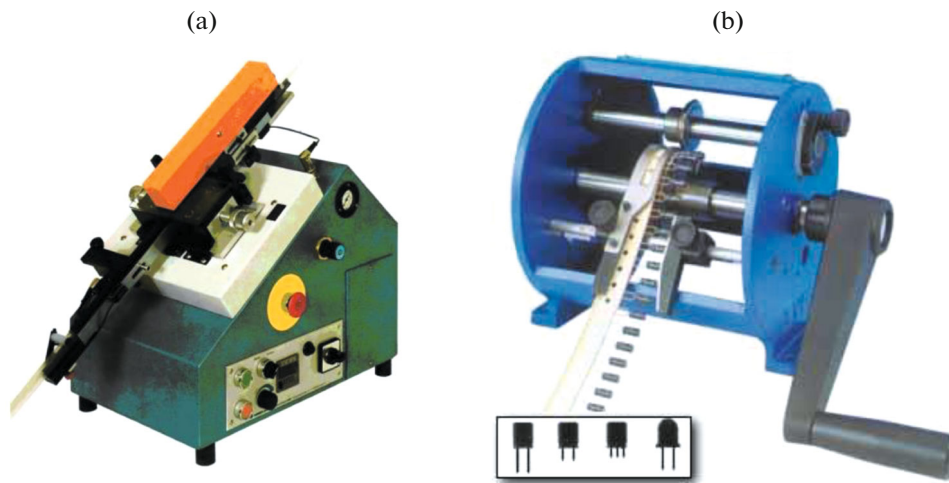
Tabletop lead forming machines: (a) ICs in cassette and (b) components in tape.
